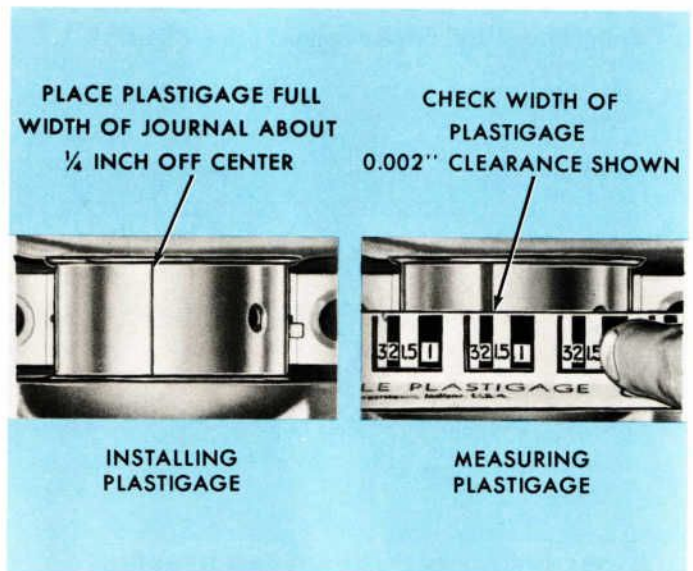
MEASURING MAIN BEARING CLEARANCE
